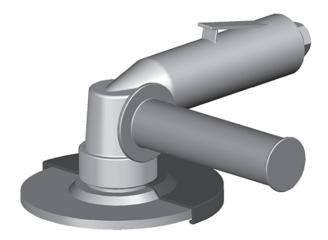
Pneumatic angle grinder whose motor serves as main handle
